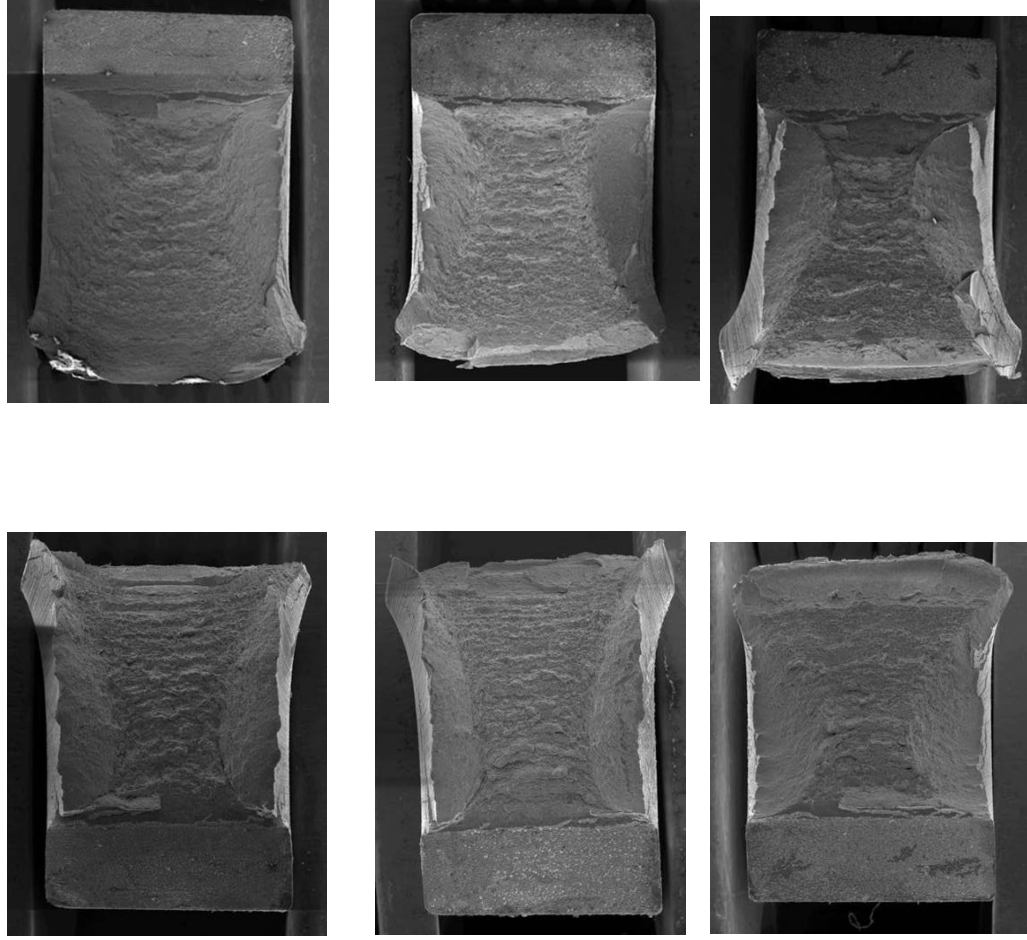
Tested impact specimens E1 04, E1 05, E1 06 after testing (Macro) and after complete breaking (SEM)
